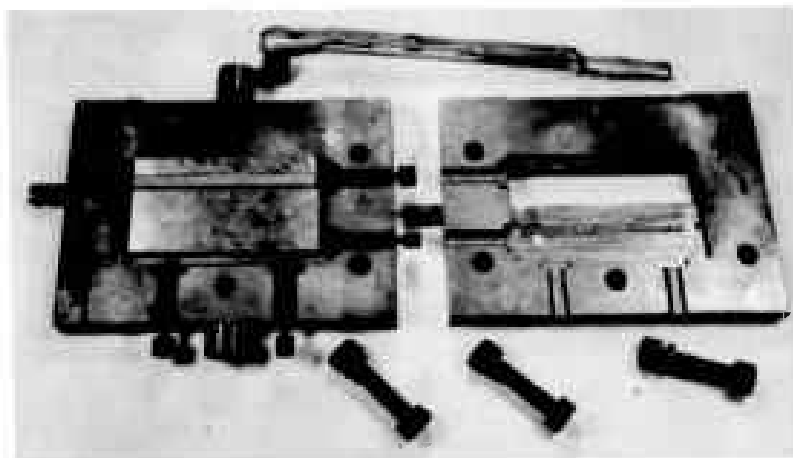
Welding Fixture for Holding Wheel-and-Bucket Design Test Specimen. A Specimen for Submerged-Melt Welding is in Place. The Measured-Torque Wrench is Used for Tightening All Bolts.
